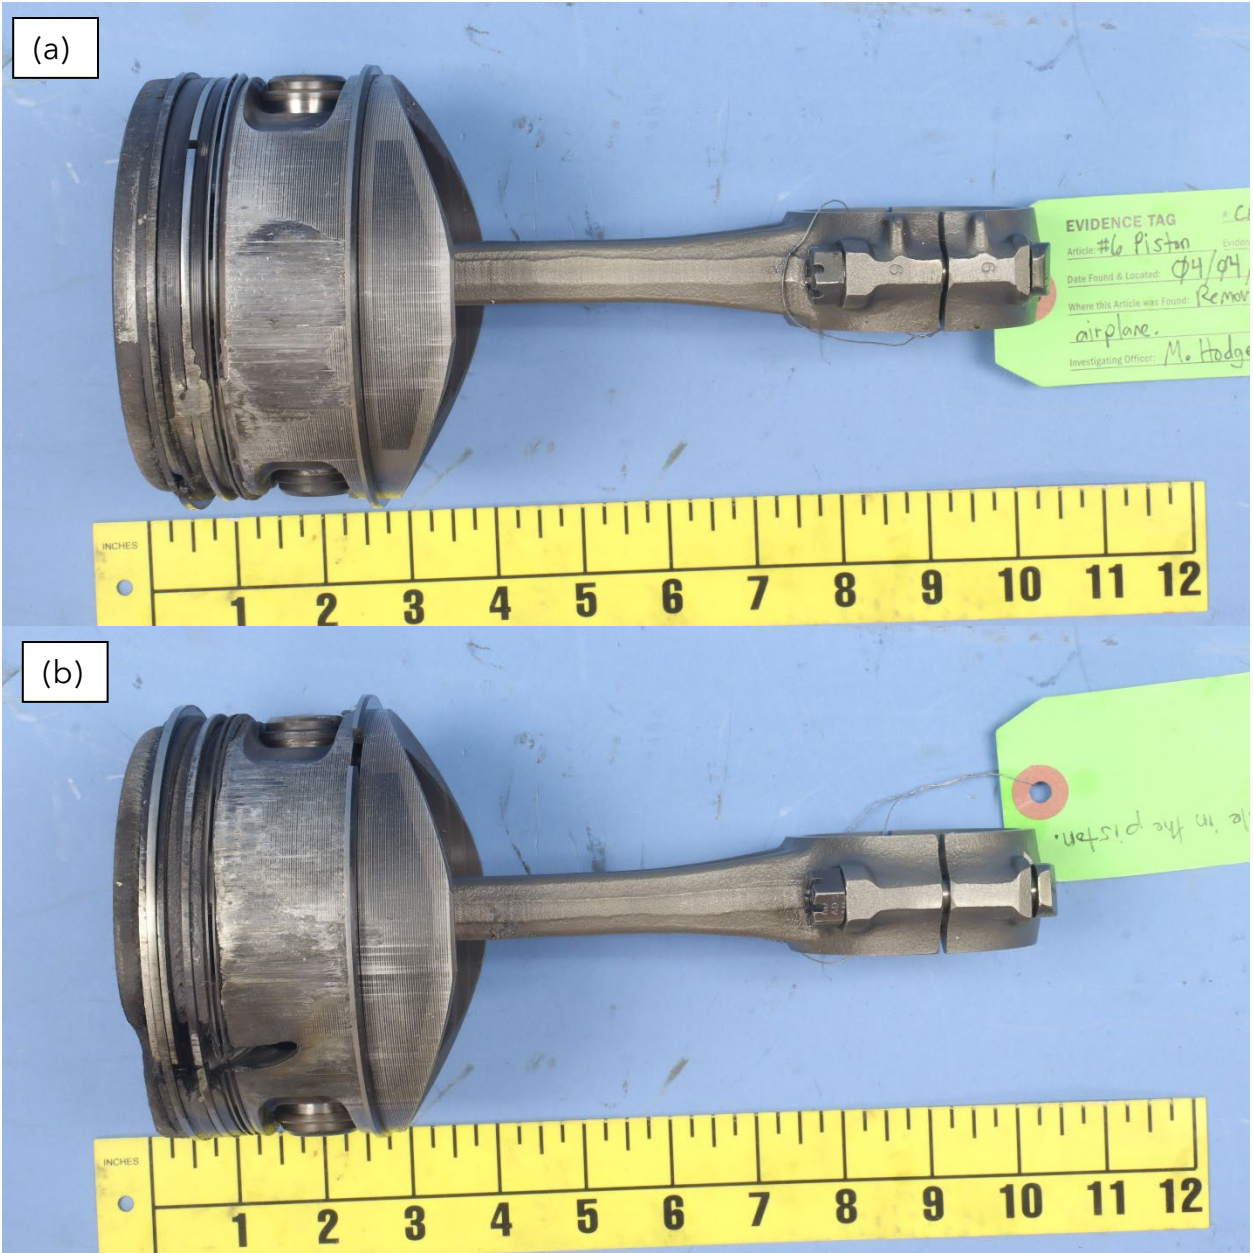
View of the piston and connecting rod, from 90° of the views in Figure 23, showing sliding wear along the piston skirt surfaces.
